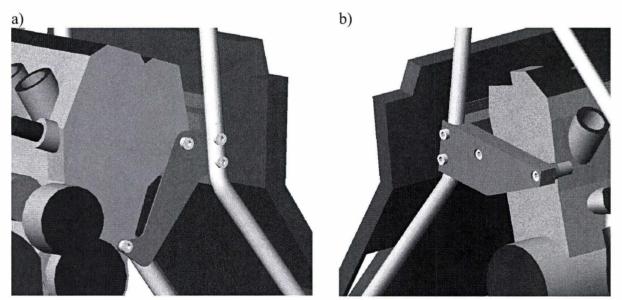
Connection engine to roll hoop a) right side b) left side
